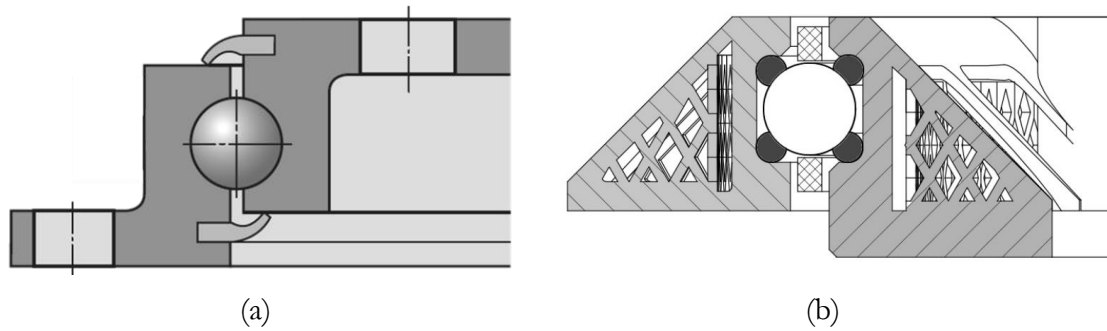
(a) Light series slewing bearing [23]; (b) 3D printed rings wire-race bearing [1].
